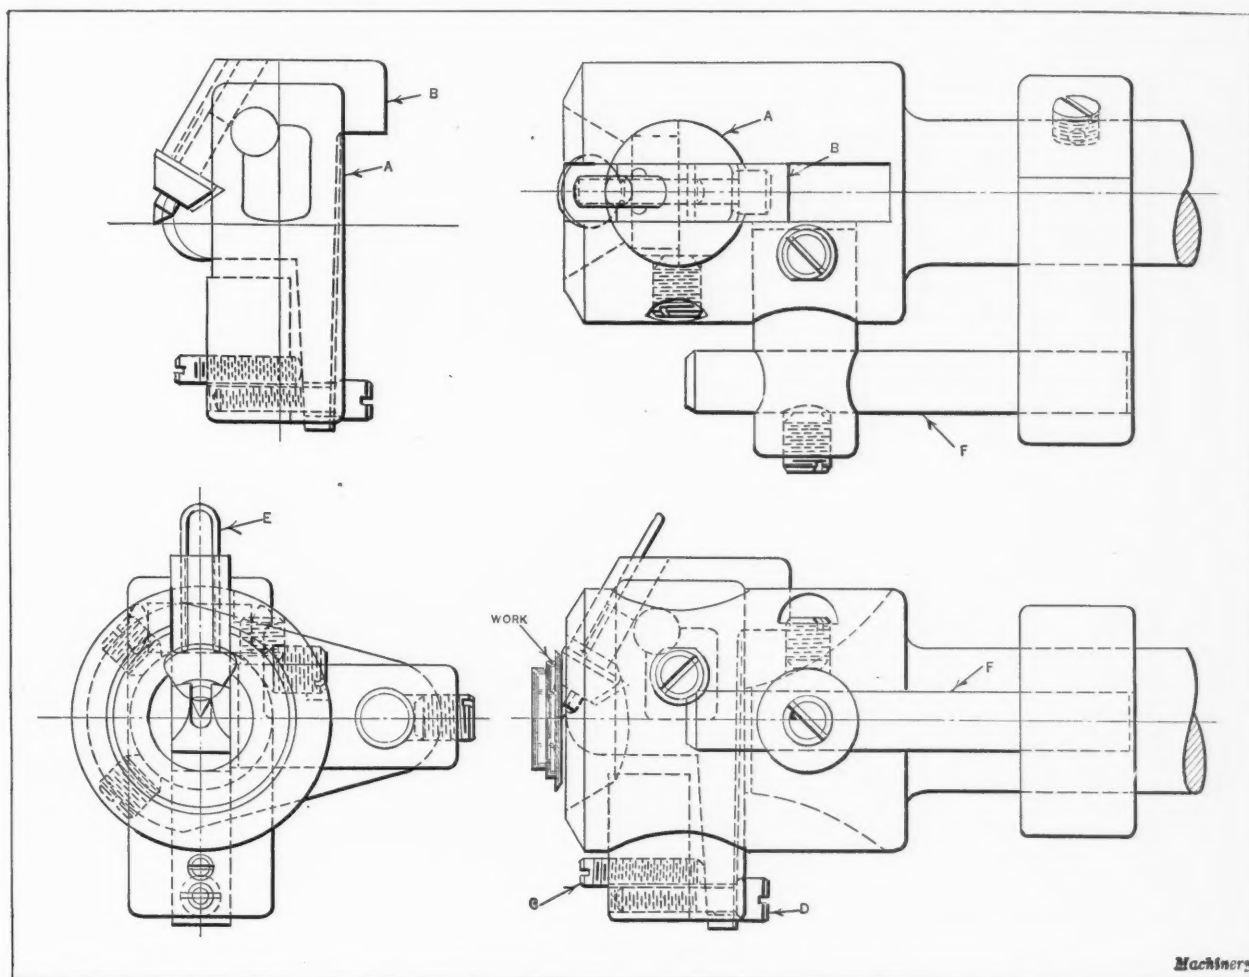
Detail Views of Single Roll Face-knurling Tool
